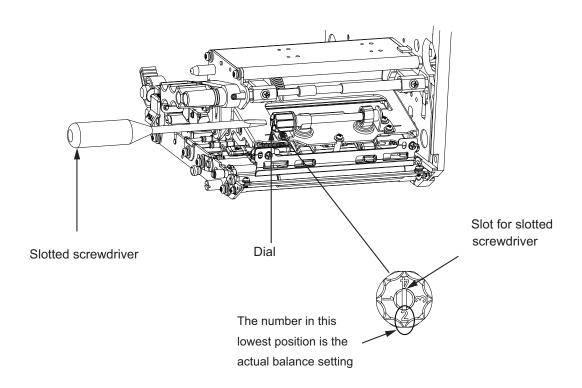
, Print Head, Adjusting Head Pressure and Balance
